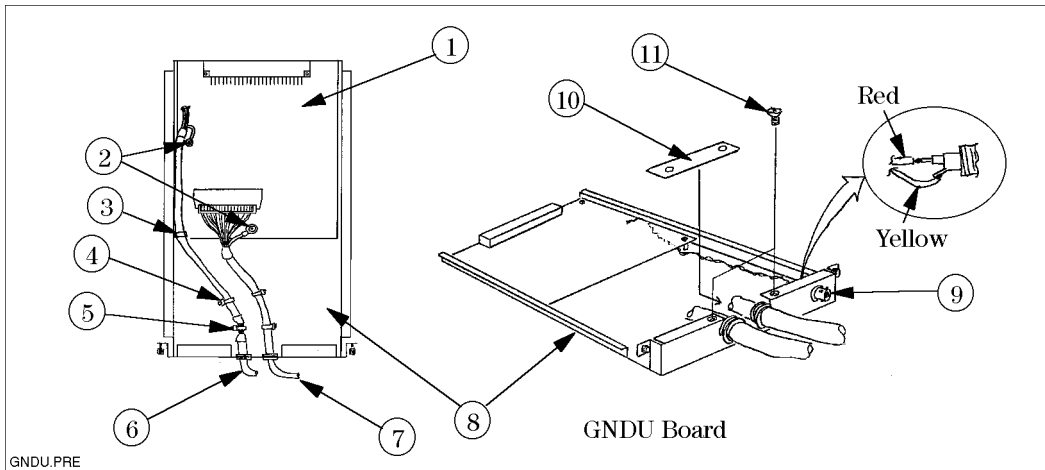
GNDU & I/F Module (41501-61001) Parts Location (1 of 2)
